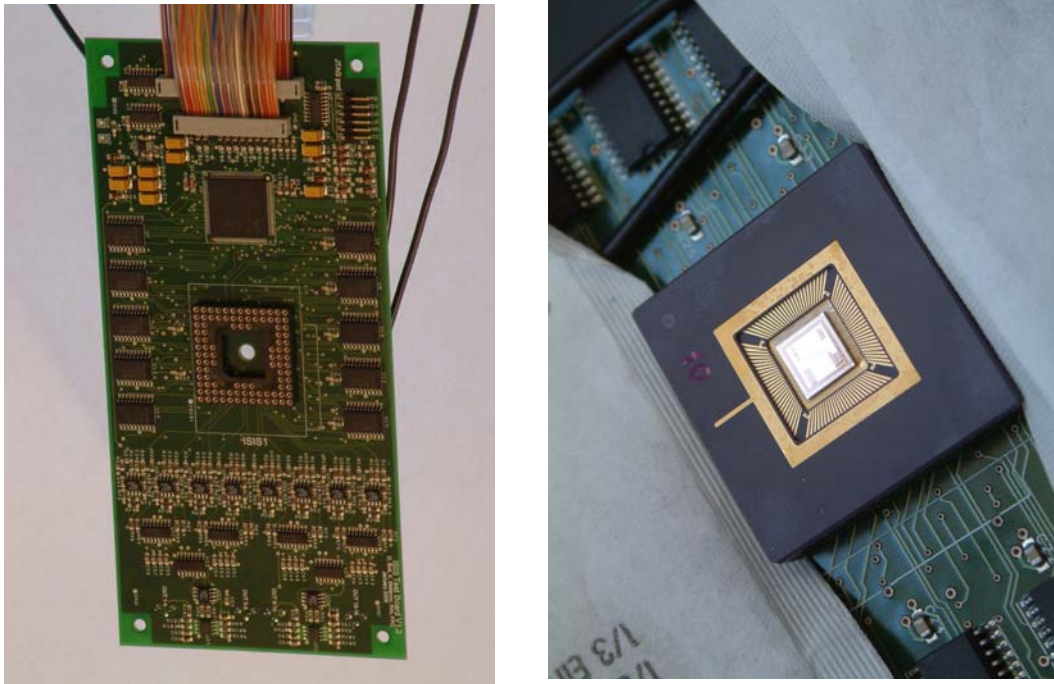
The carrier board without ISIS chip showing the hole for the beam (left) and the ISIS chip mounted in position on the board (right).
